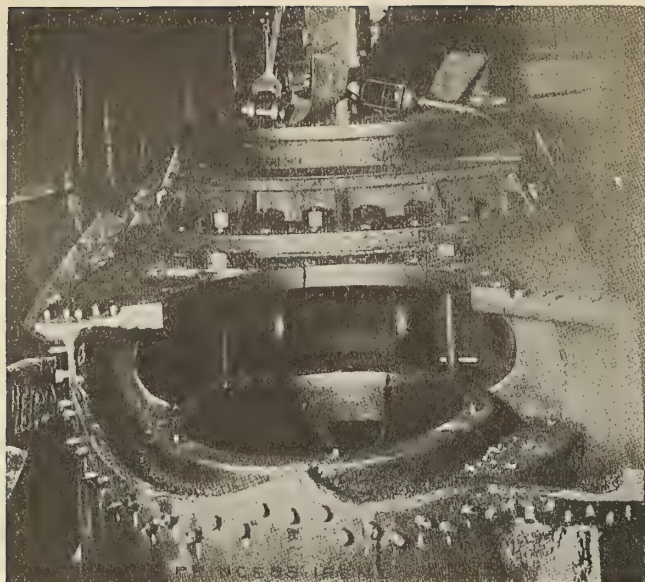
Prinzess Irene*, Damaged Intermediate Pressure Valve Chest, Ready for Insert, Preparatory to Welding
